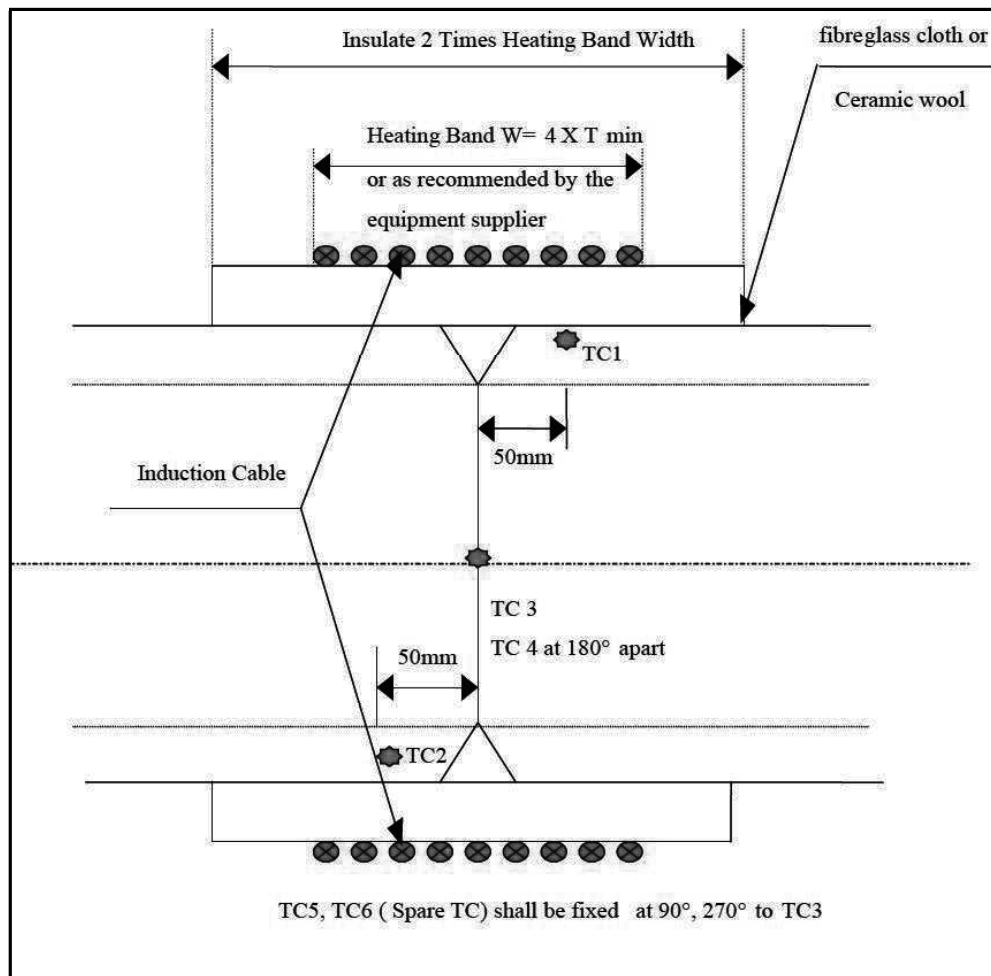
Placement of Thermocouples on P91/P92/F91/F92/C12A materials for PWHT
